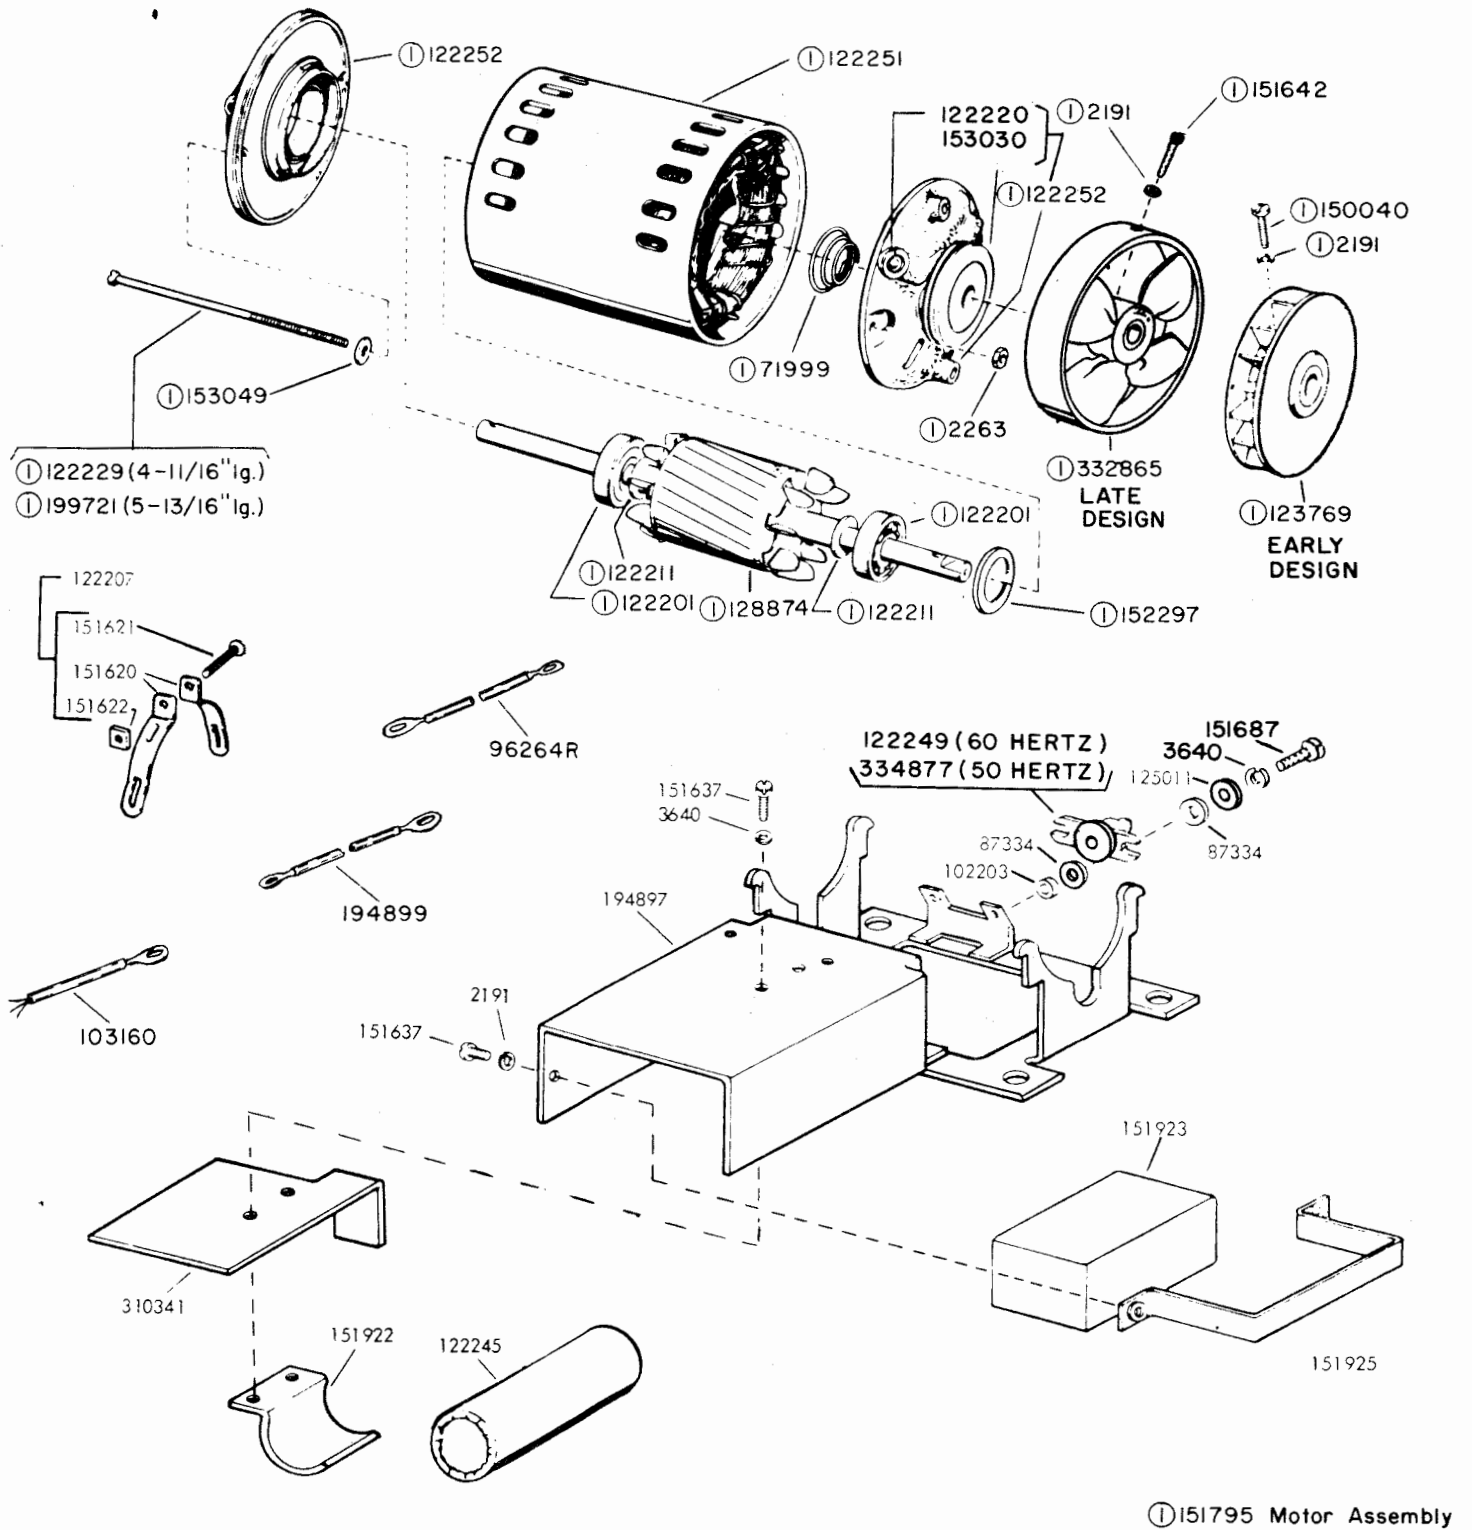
Motor Assembly and Relay/Capacitor Mounting
